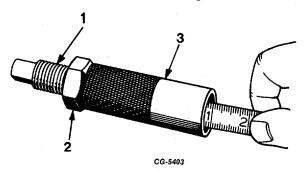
Adjusting Valve Guide Installer SE-1943 for Proper Height
